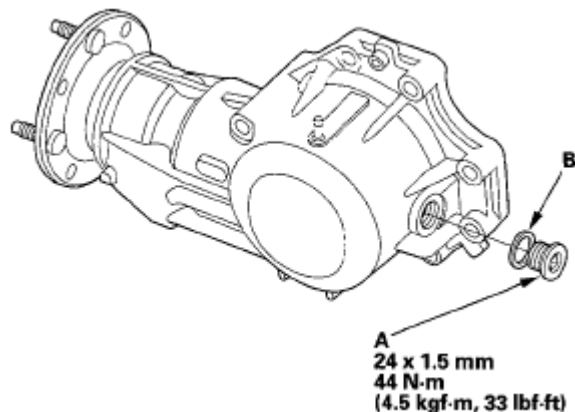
Identifying Filler Plug And Sealing Washer With Torque Specifications
